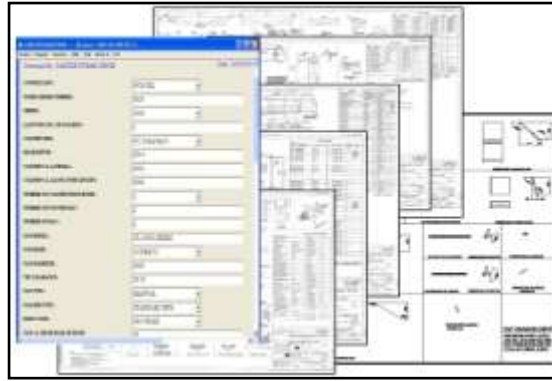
Input Screen, 5-Fabrication and 1 CNC Input Drawings.
